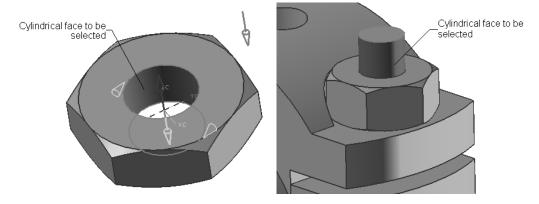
Cylindrical face from the Lock Nut to be selected
